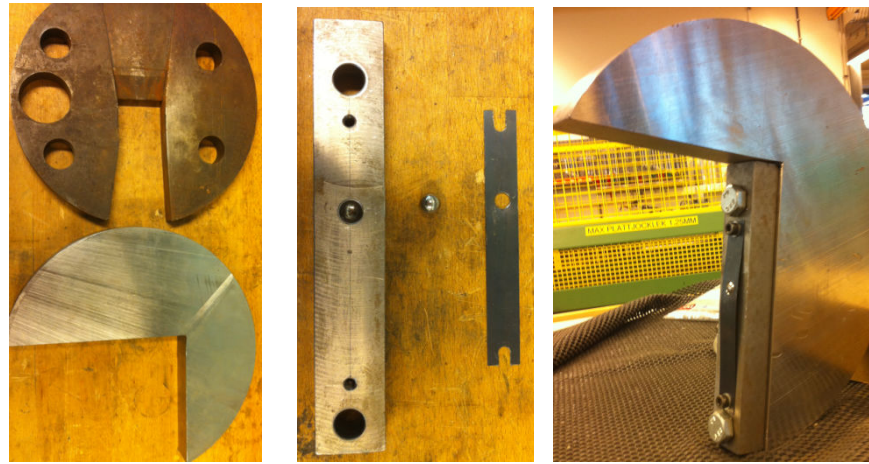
Pictures of modified hammer and blade: a hard steel ball has been used
